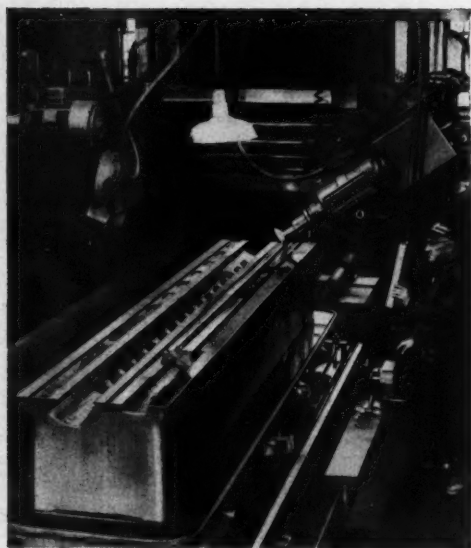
This Pope tilting head, for which an extension arbor is provided, is employed for grinding various angular, vertical and under surfaces
